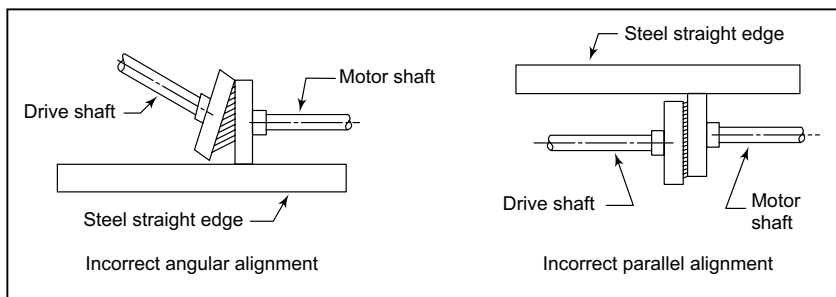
Checking the alignment of the shaft of the prime mover with the pump shaft
